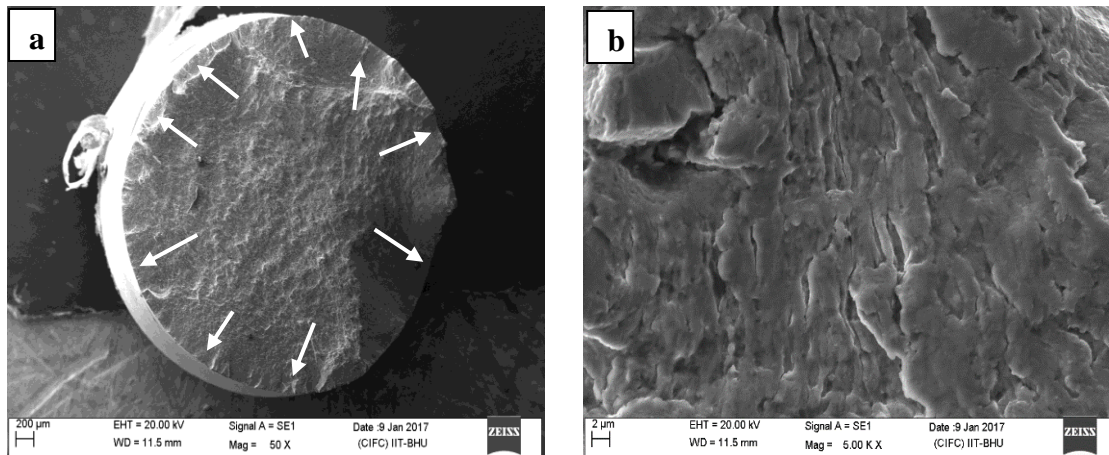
5: Fractographs of the sample fractured at the stress amplitude of ± 800 MPa ($R = -1$) at 600°C showing: (a) the fracture surface and crack initiation site, (b) transgranular crack propagation and fatigue striations with larger interstriation spacing.
